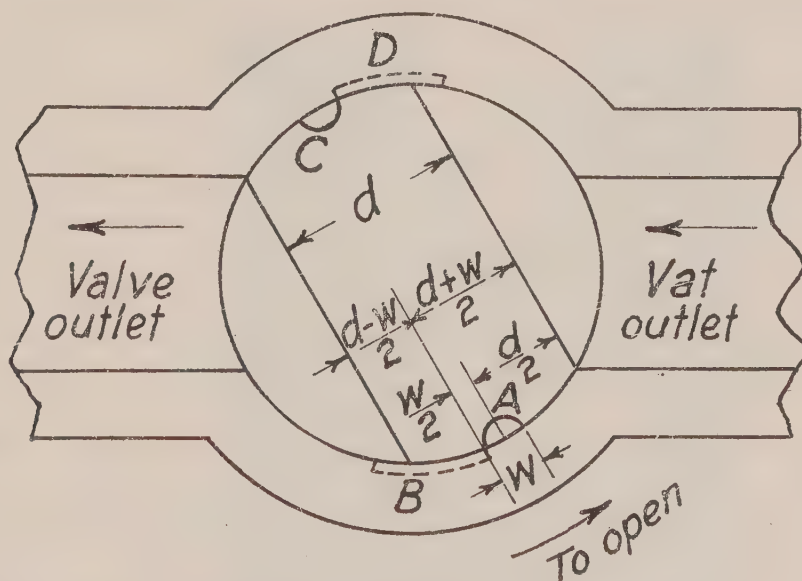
Valve design A, horizontal section through axis of plug channel, valve in "just-closed" position.
